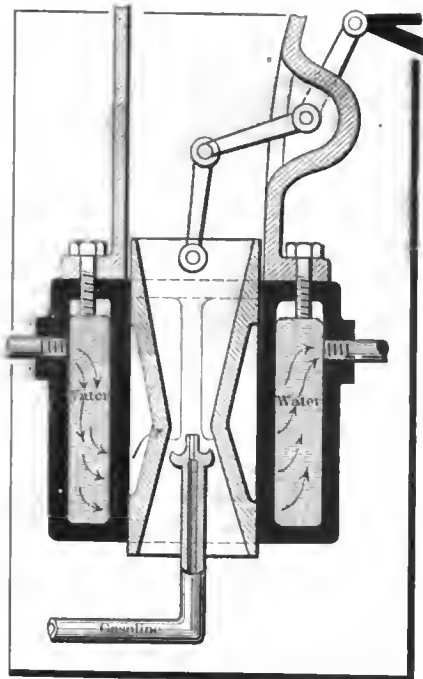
Showing water jacket around carburetor, indicating a recovery of some of the waste heat
